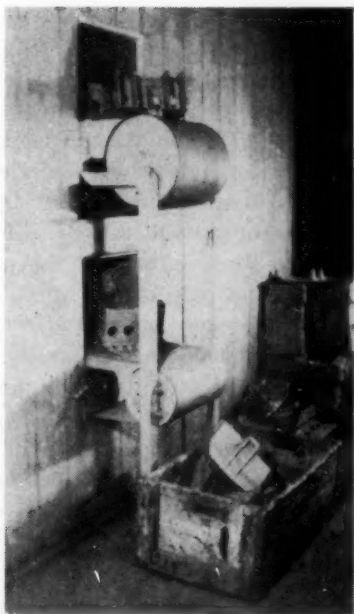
PRESENT FEED END ARRANGEMENT WITH CASTING RETURN.
